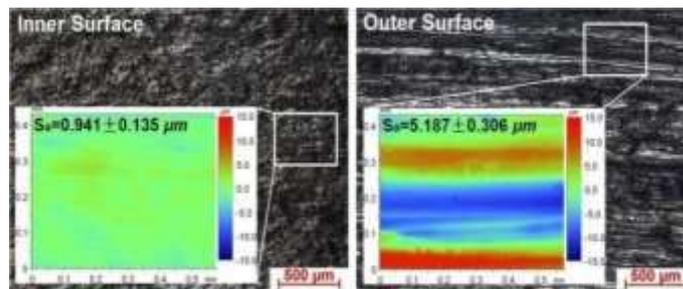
Surface finish of components formed in E-DSIF with two roller-ball tools: (a) inner surface and (b) outer surface
